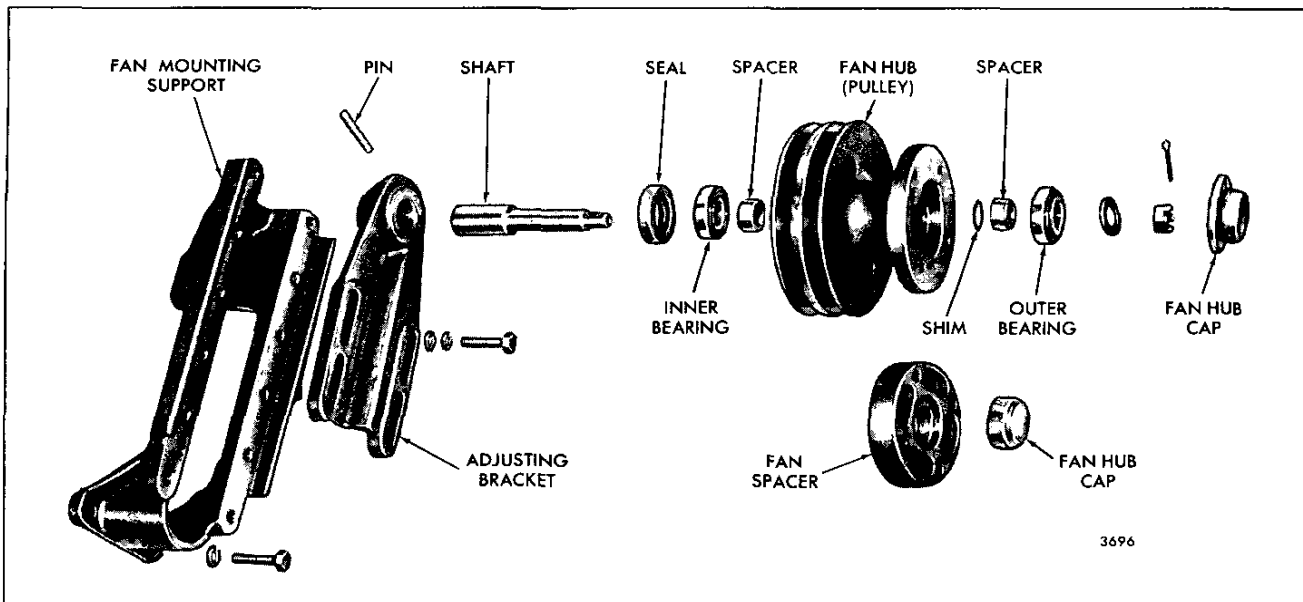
Typical Fan Hub, Shaft and Adjusting Bracket Details and Relative Location of Parts (6V Engine)
